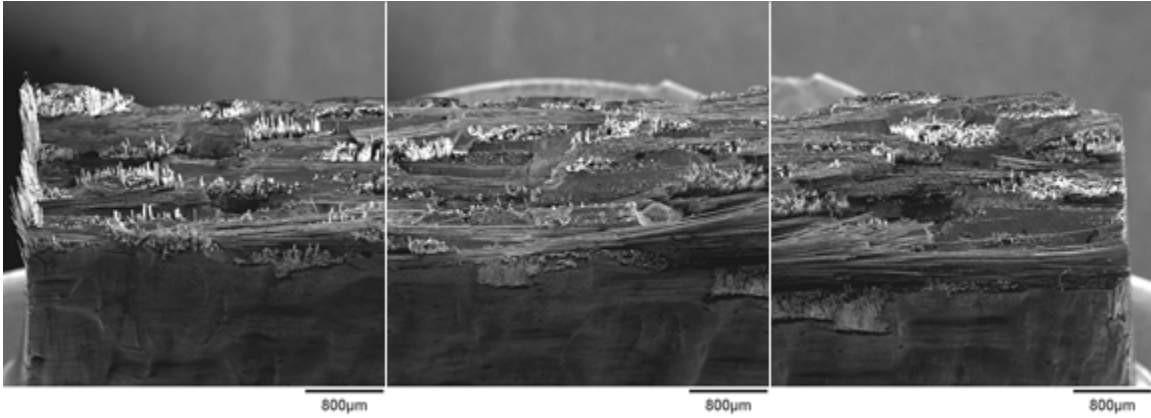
Fracture Surface at 30X - Room Temperature Monotonic
